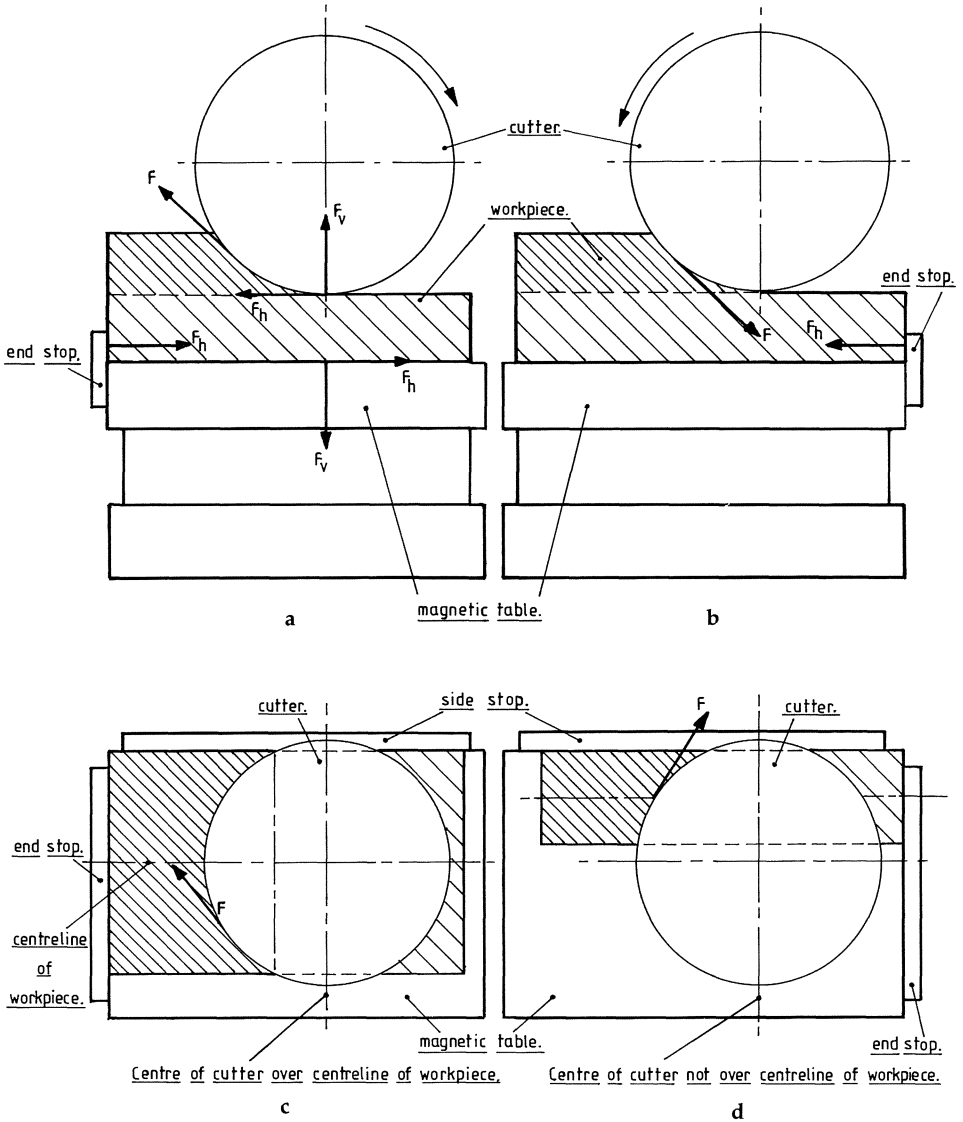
The force vectors with different milling techniques on magnetic tables. a Up-cut milling. b Down-cut milling. c On-centre milling. d Off-centre milling. [Courtesy of Eclipse Magnetics Ltd.]
